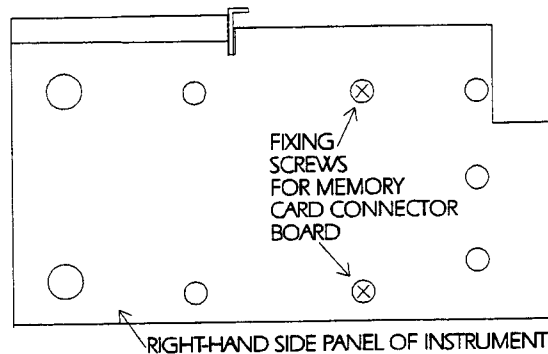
Memory Card Connector board Chassis Fixing Screws
